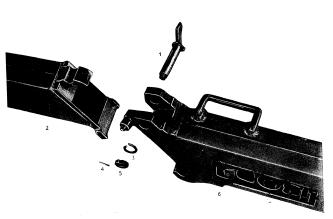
FRONT AND REAR CARRIAGE TRAIL CONNECTING BOLT — DIS-
